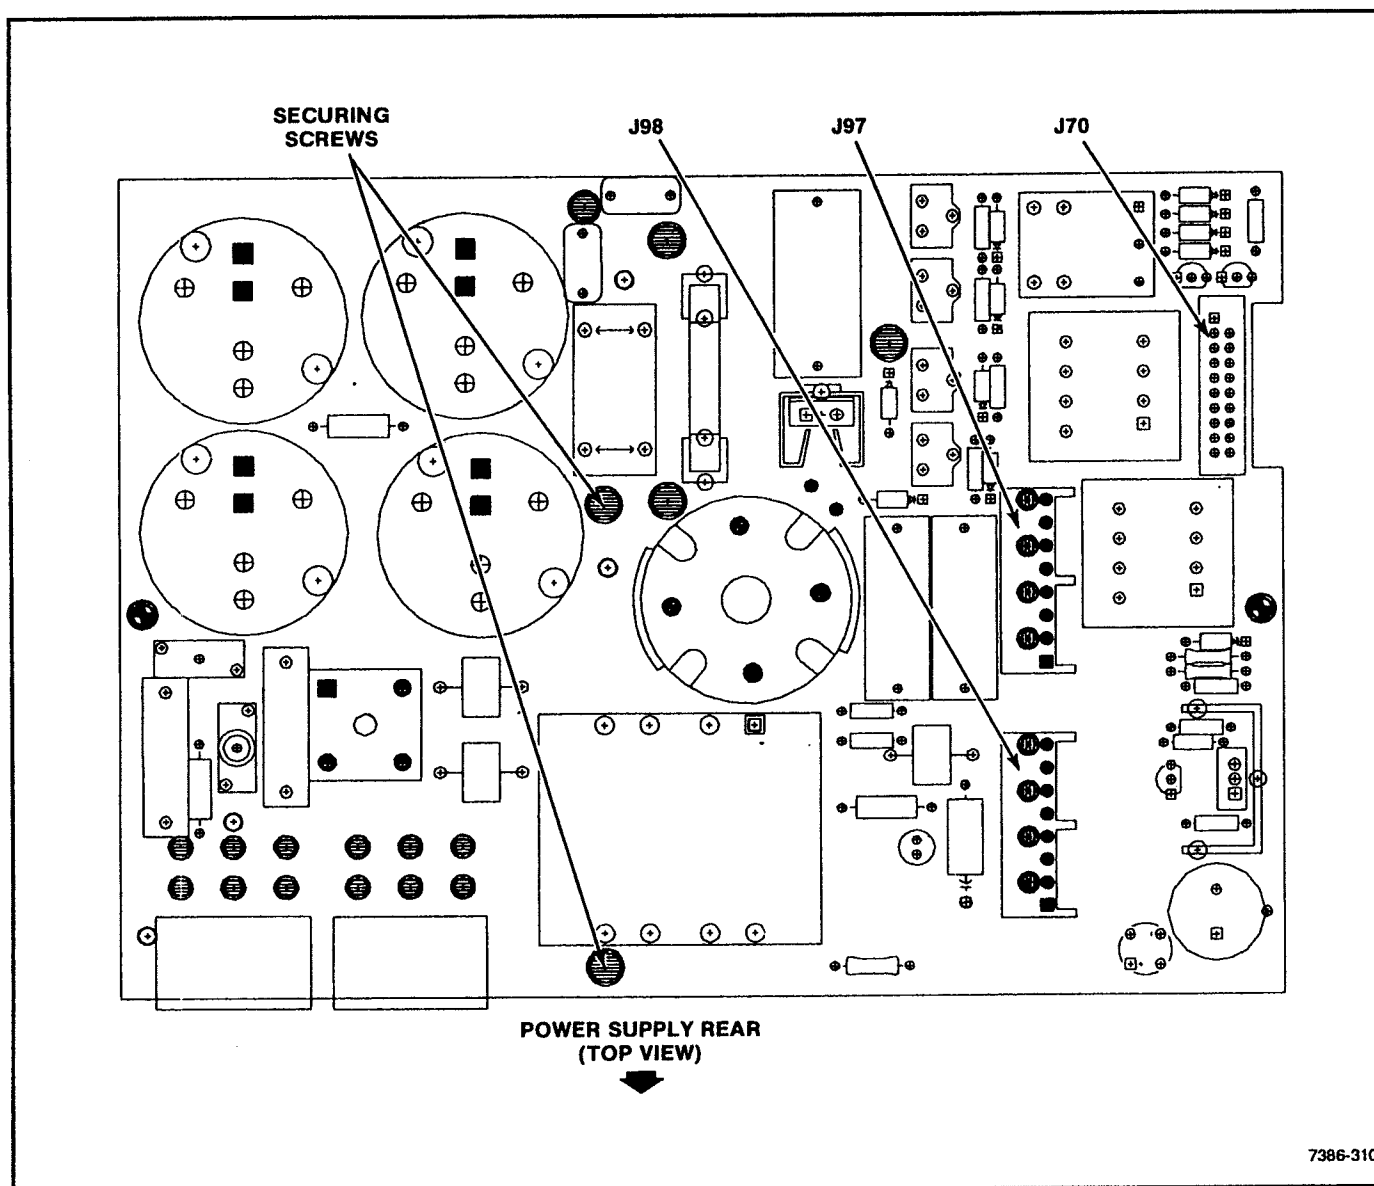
Connector locations for removal of the A2A1 Line Inverter board.
